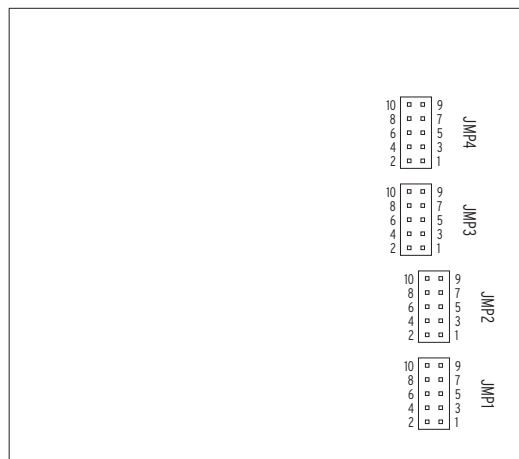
Circuit Board of Analog I/O Board, Showing Jumper Selection
